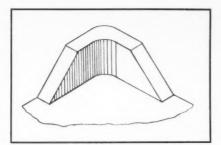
Drawing showing construction of supporting elements on cast iron jig body.
